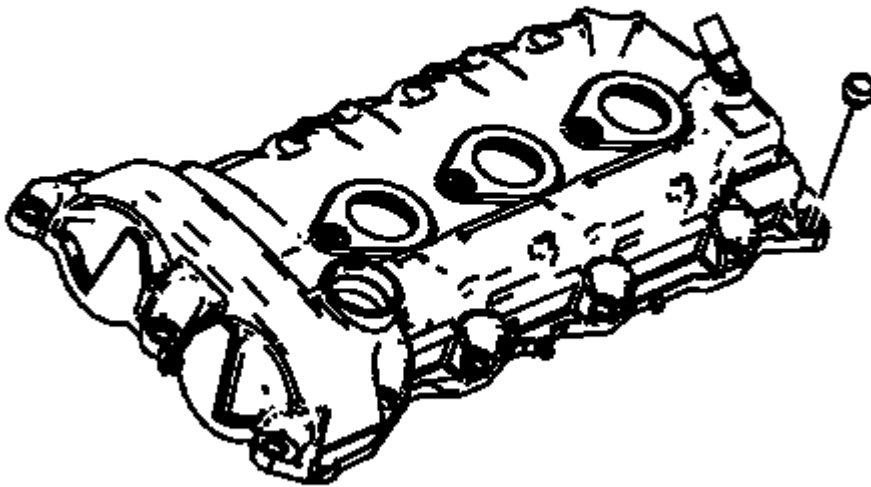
Removing & Installing Camshaft Cover Bolt Grommets
